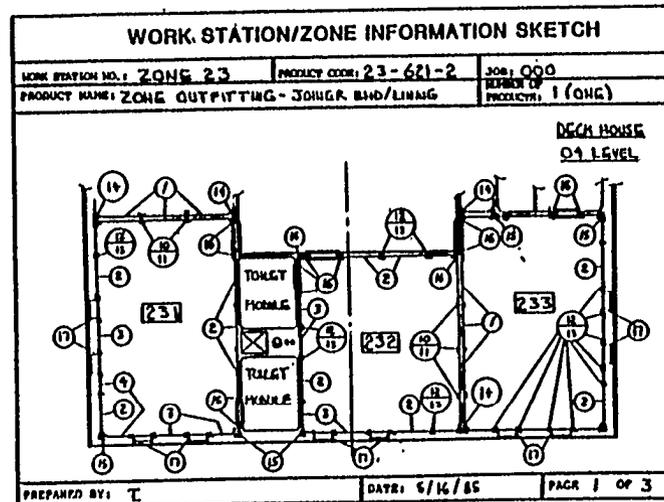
Deckhouse zone information for joiner lining and bulkheads
